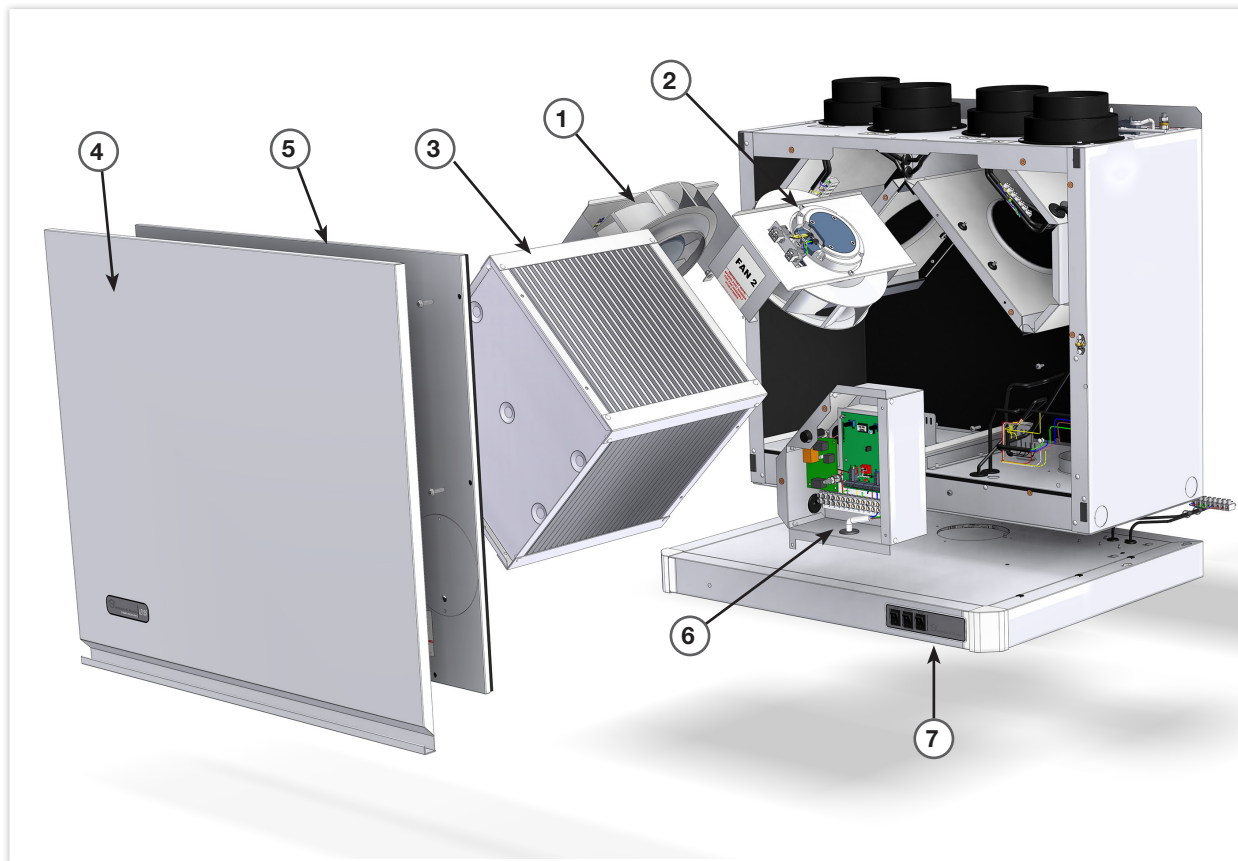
LE Mk3 EXPLODED DIAGRAM
